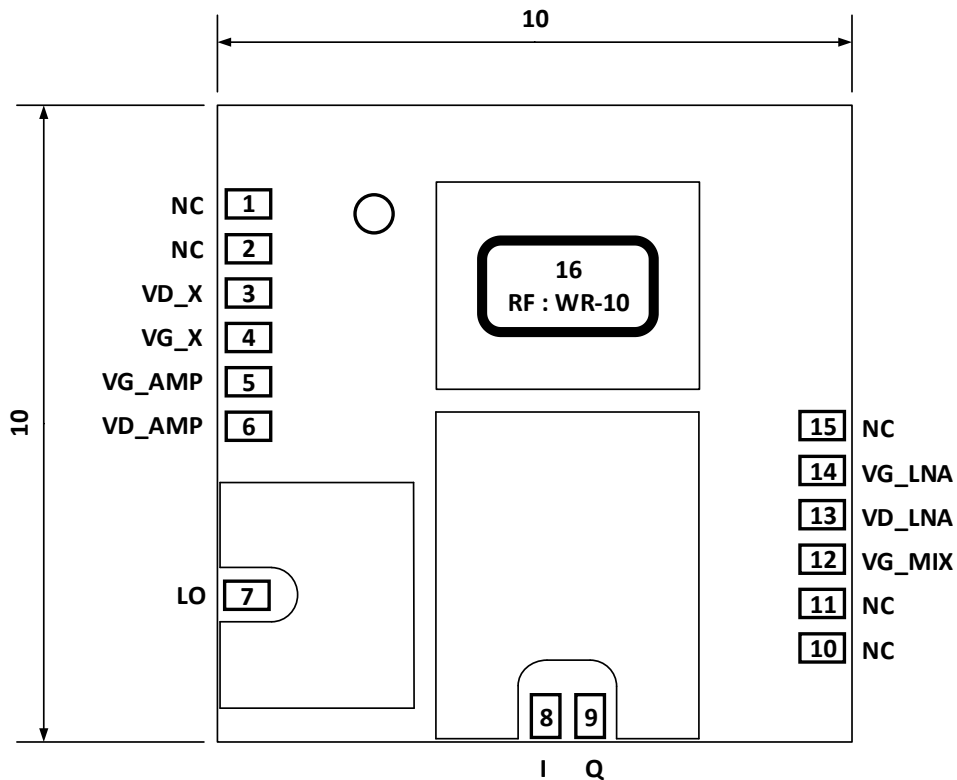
Pin configuration and outline drawing. Dimensions in [mm].
